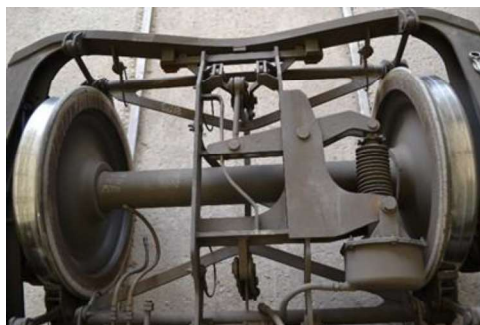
picture of the brake rigging mechanism mounted on the front bogie.
